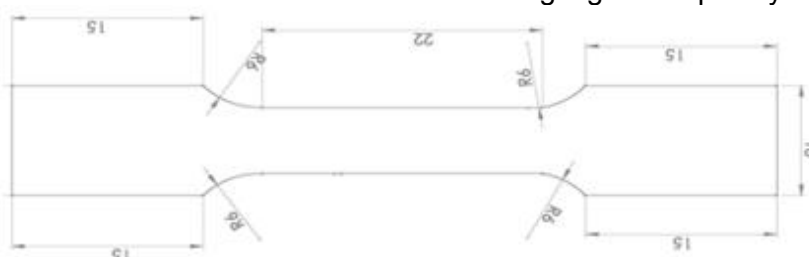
Dimensions (in mm) of tensile and fatigue specimens
